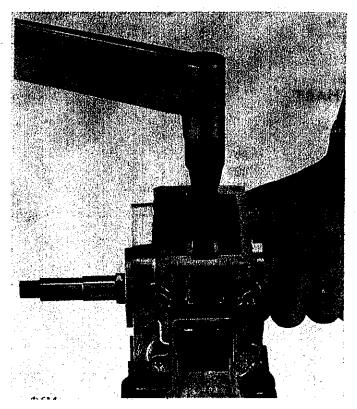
INSTALLING CONNECTING ROD CAP SCREWS
